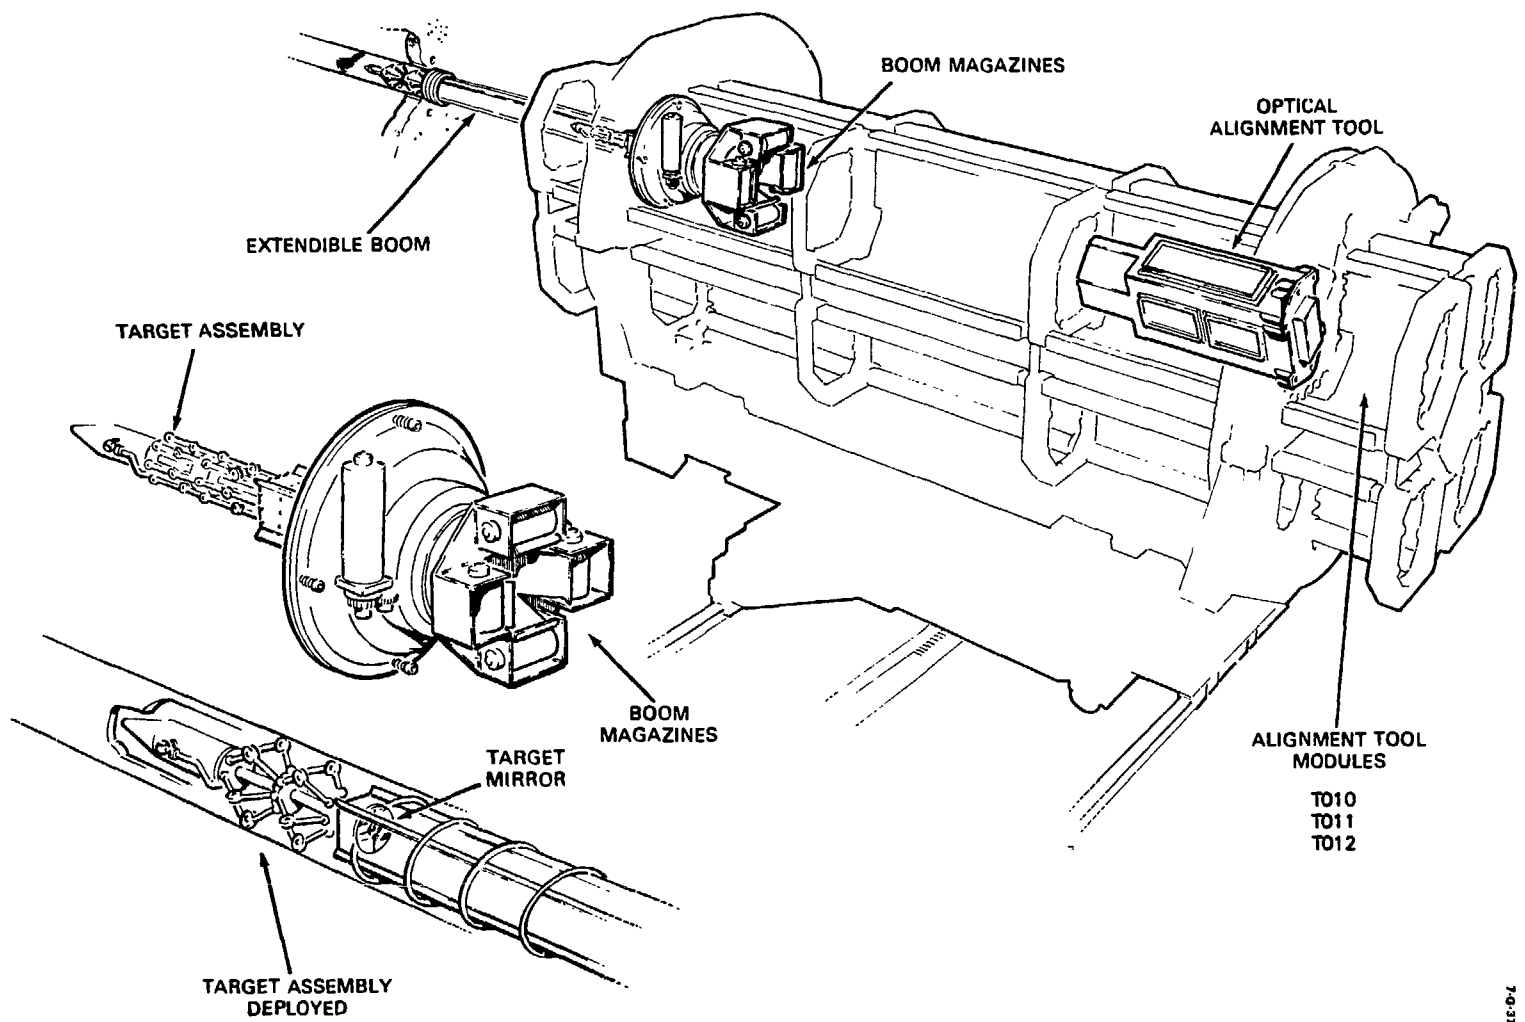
OPTICAL ALIGNMENT TOOL ASSEMBLY
